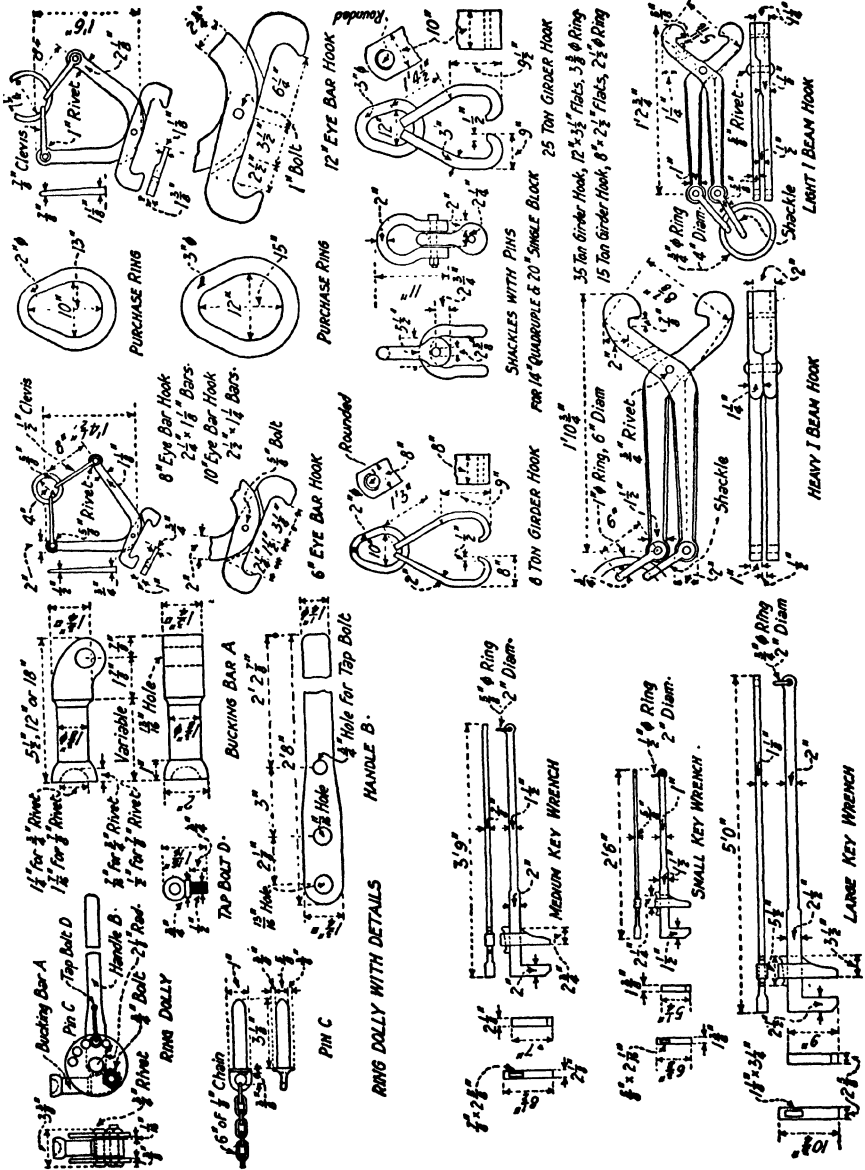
Tools for Steel Erection. (Courtesy American Bridge Co.)
